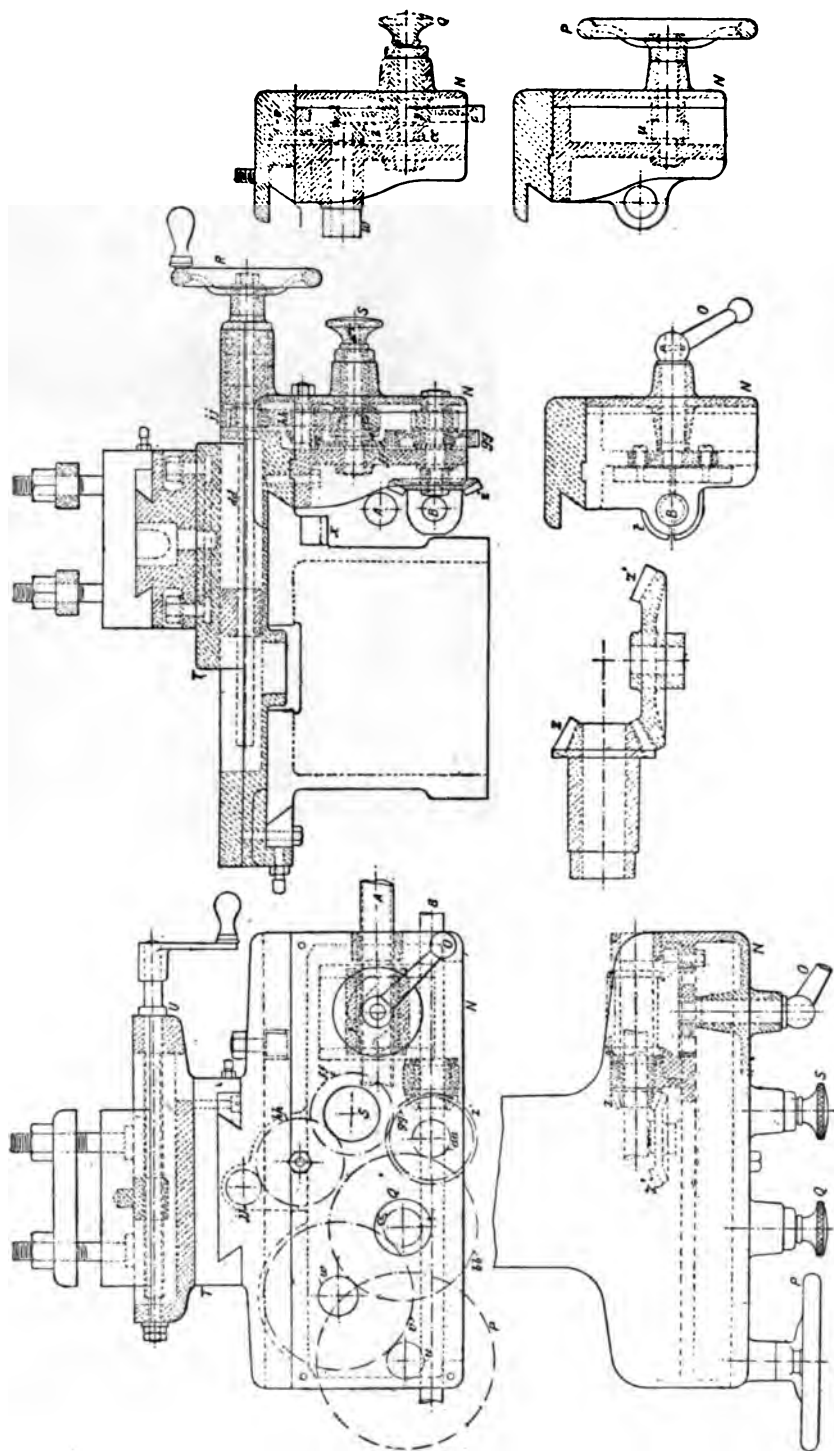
Screw-Cutting Lathe. (Slide Rest, and Gears.)
